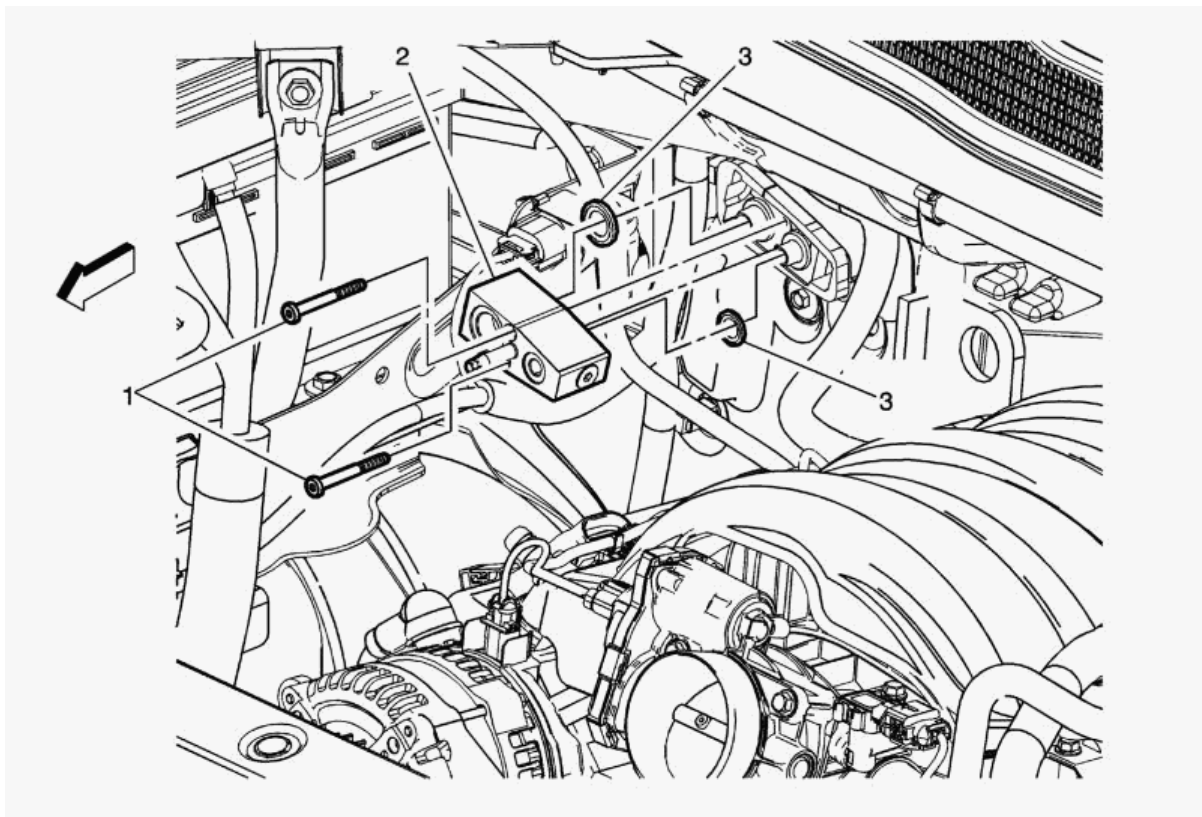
Air Conditioning Evaporator Thermal Expansion Valve
